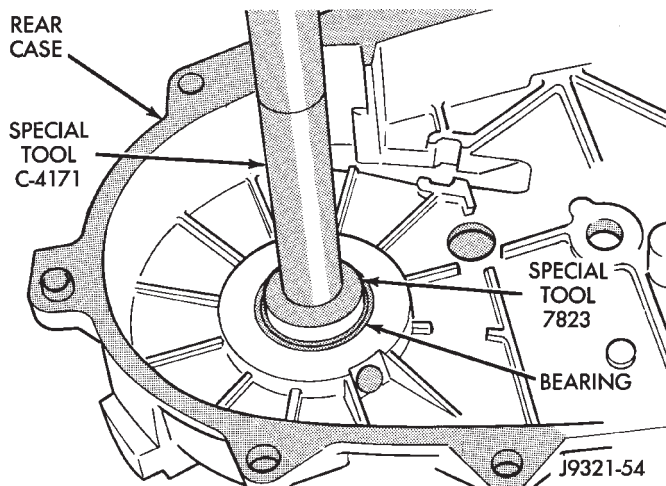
Removing Front Output Shaft Rear Bearing
